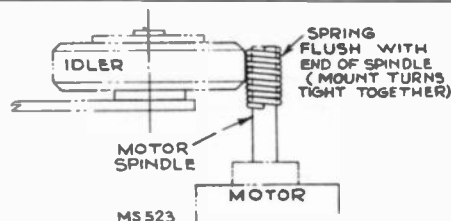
Spring Sleeve Installed on 60-Cycle Motor Spindle for Operation on 50-Cycle Supply.
